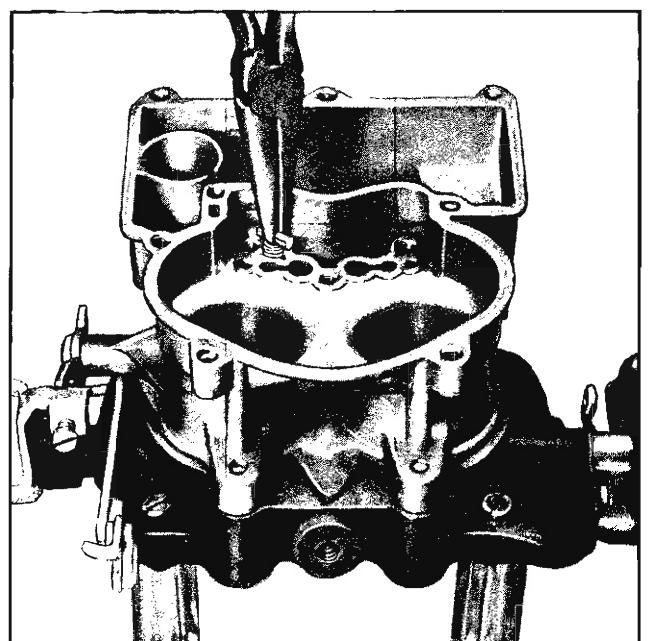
B-74 Removing Pump Discharge Spring Retainer
